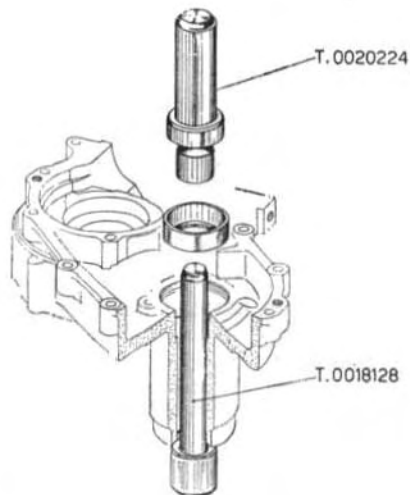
Re-assembling bush on mainshaft inner bearing
